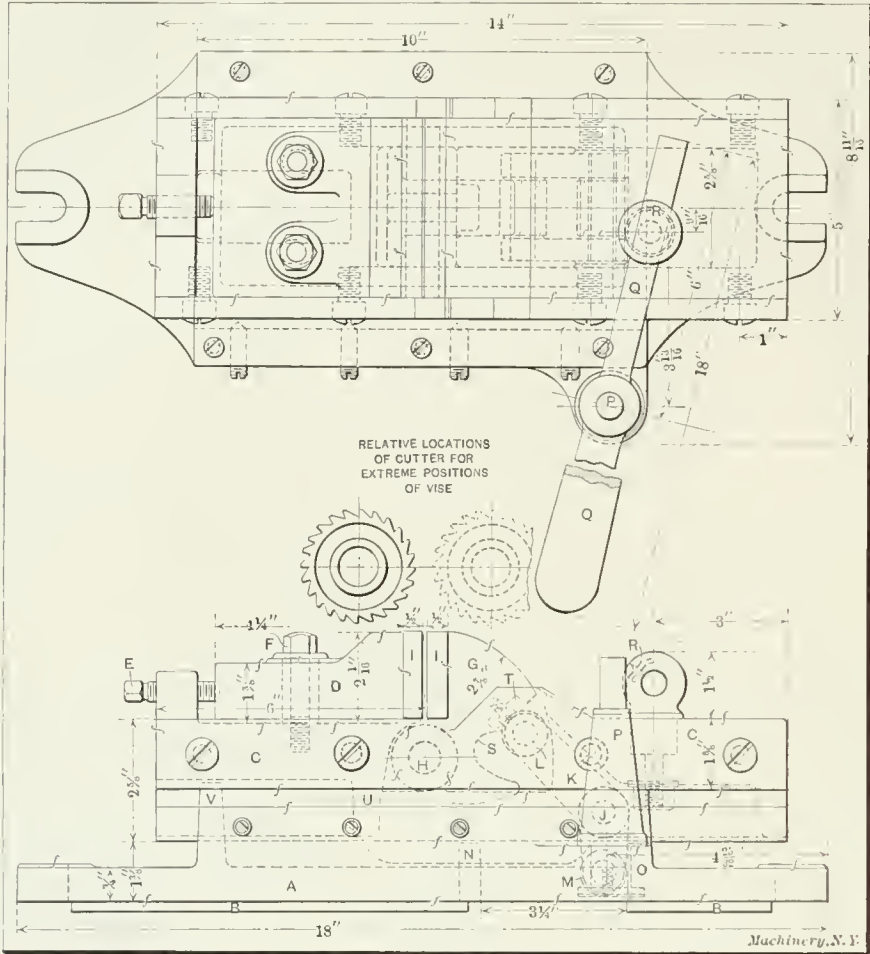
Assembly View of Semi-automatic Milling Machine Vise for Milling Thin Pieces
